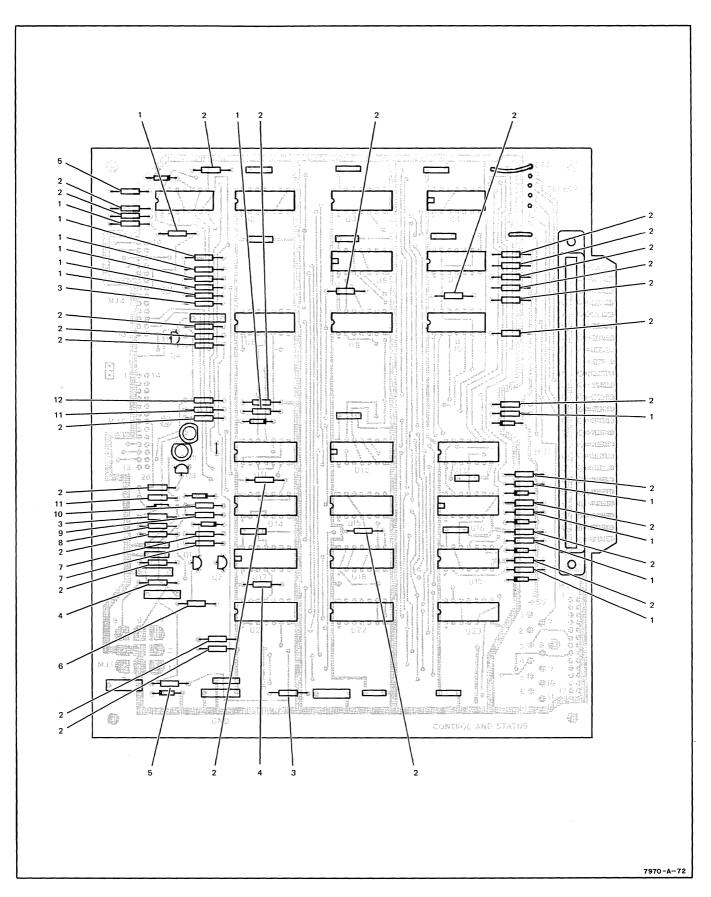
Control and Status PC Assembly A16 (Sheet 1 of 2)
